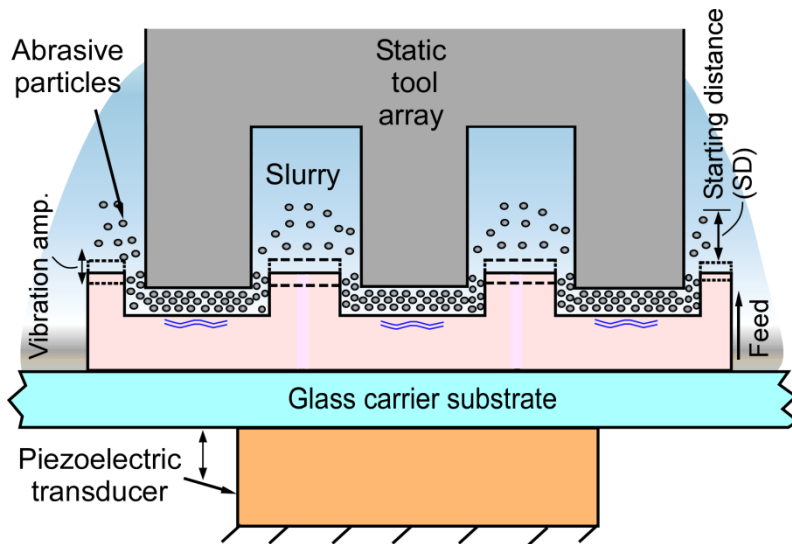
Concept of batch-mode μ USM using workpiece vibration. The batch-tool is static while the workpiece vibrates in the cutting direction. A gradual feed of the workpiece towards the tool causes machining due to physical attrition of the abrasive particles on the workpiece.
